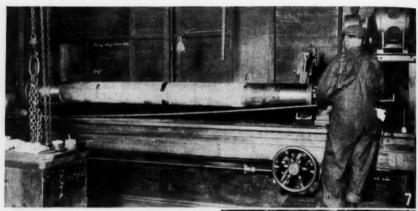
The ends of this Duriron tube are finished by grinding in this machine. Fig. 8—Cutting a groove in the tube to hold a wire for a removable head. A tungsten carbide tool is being used.
